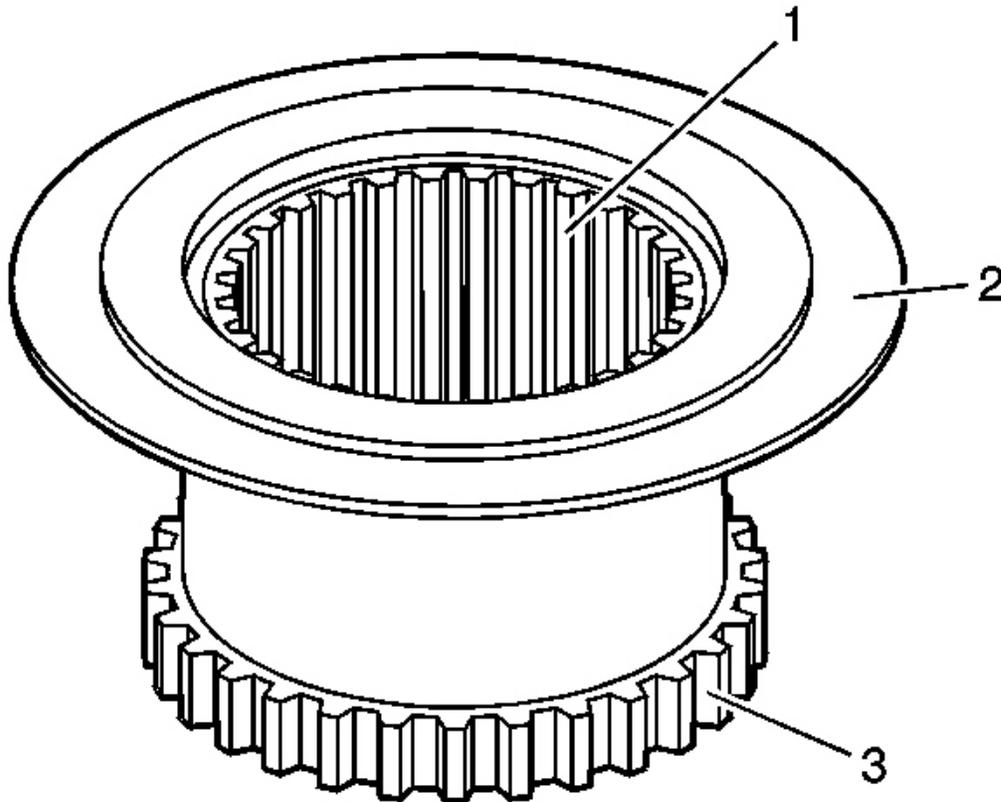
Identifying High/Low Range Shift Sleeve Inspection Areas
